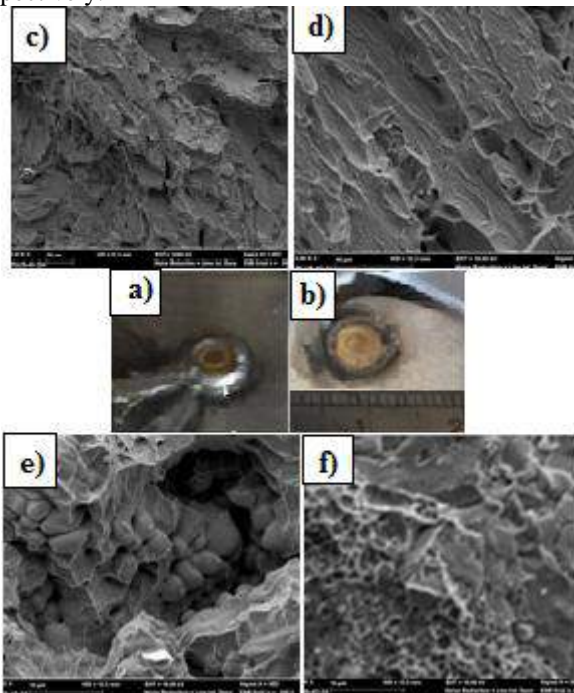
Fracture images of AR weldment a,c,d) Partial interfacial fracture 15 cycles, b,e,f) Pullout fracture
